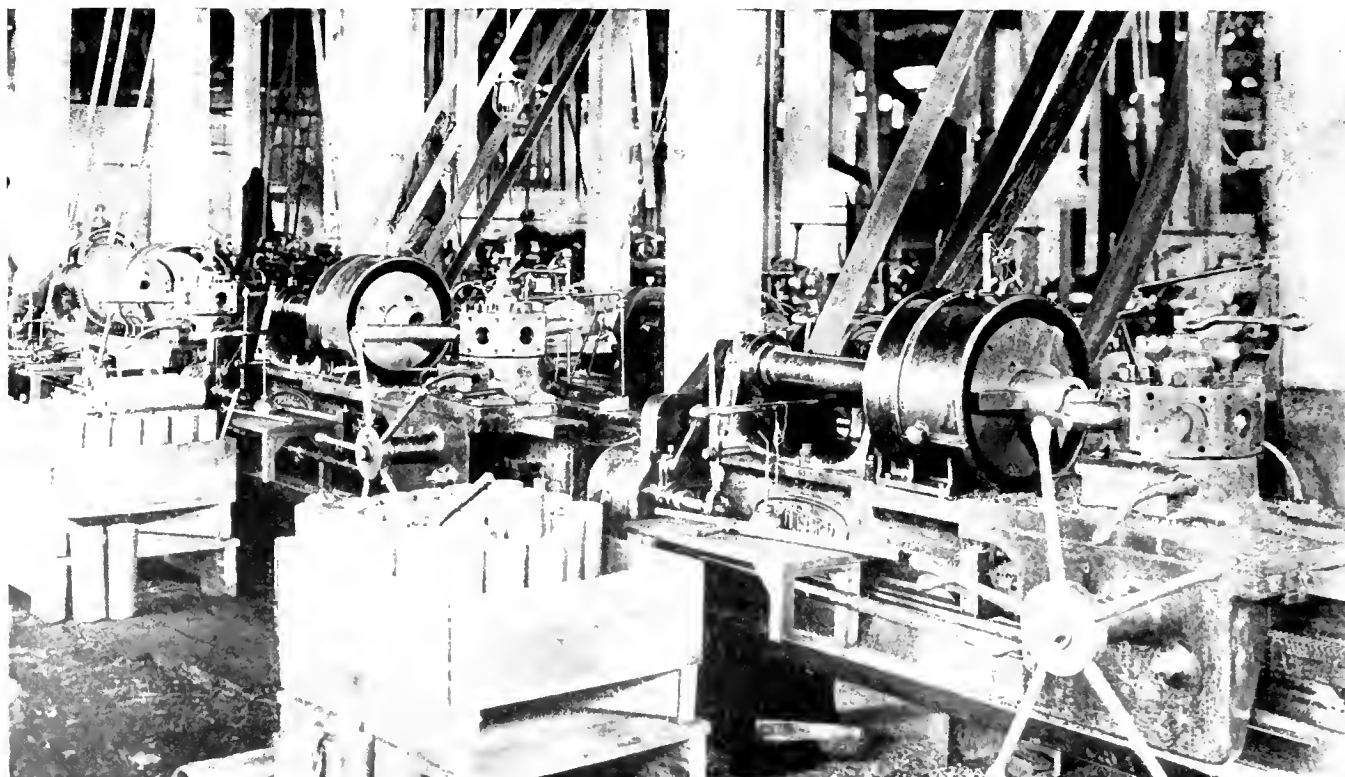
GROUP OF "SINGLE PURPOSE" LATHES MACHINING INSIDE OF SHELLS.
